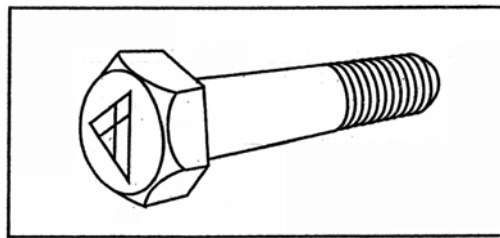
, Close tolerance bolts carry a triangle mark on their heads and are ground to a much tighter tolerance than standard bolts.
